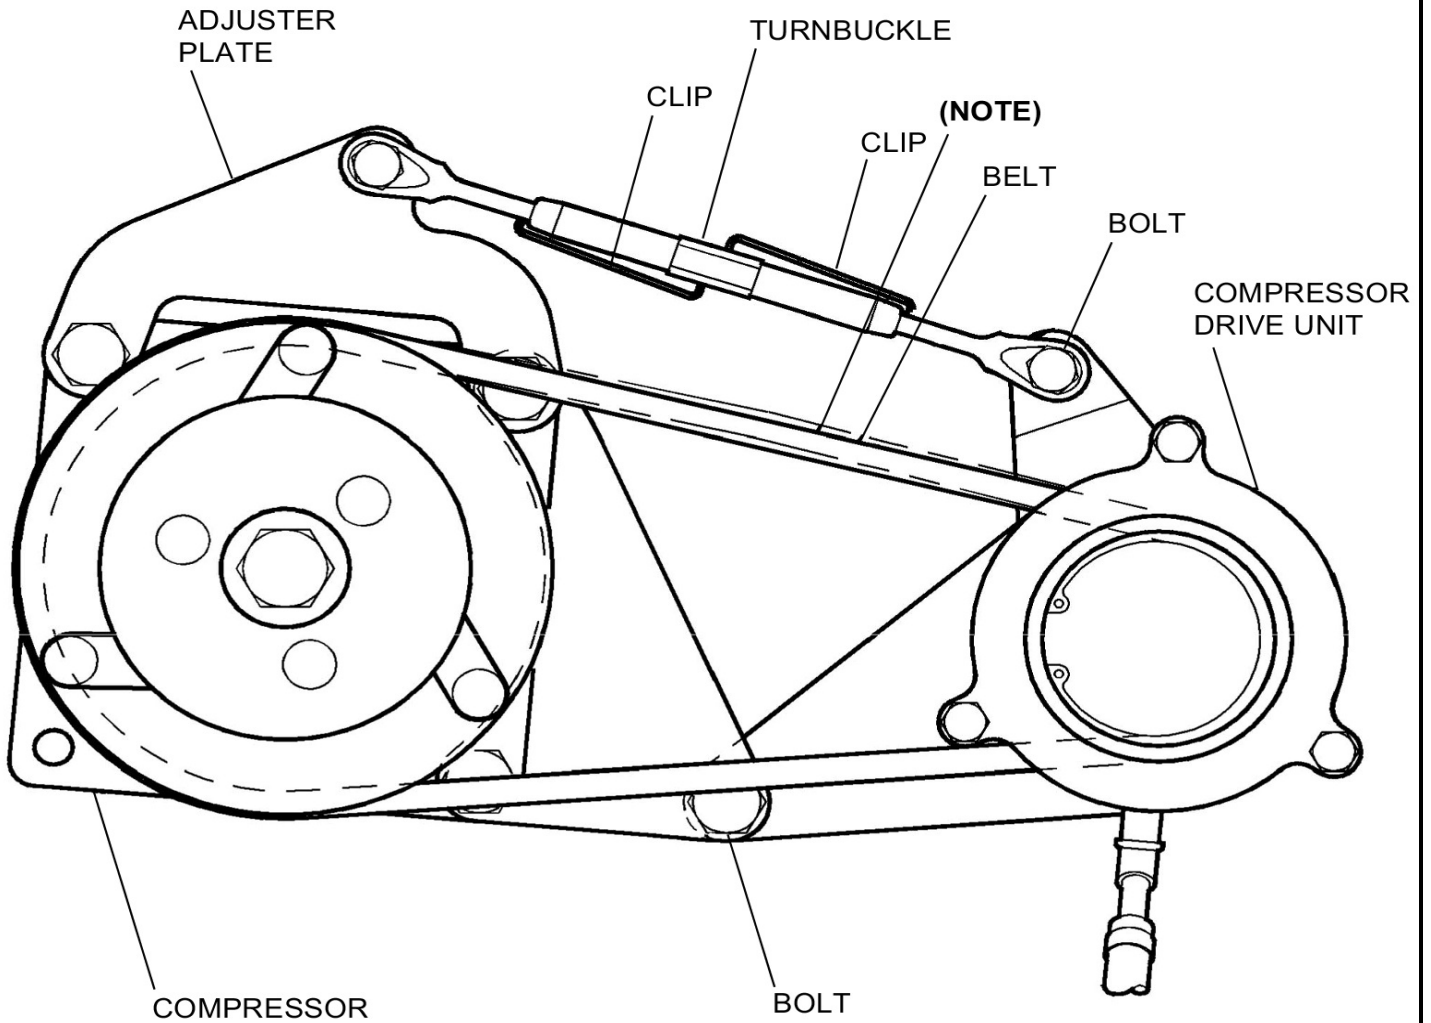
Sheet 1 : Compressor Drive Belt Adjustment
